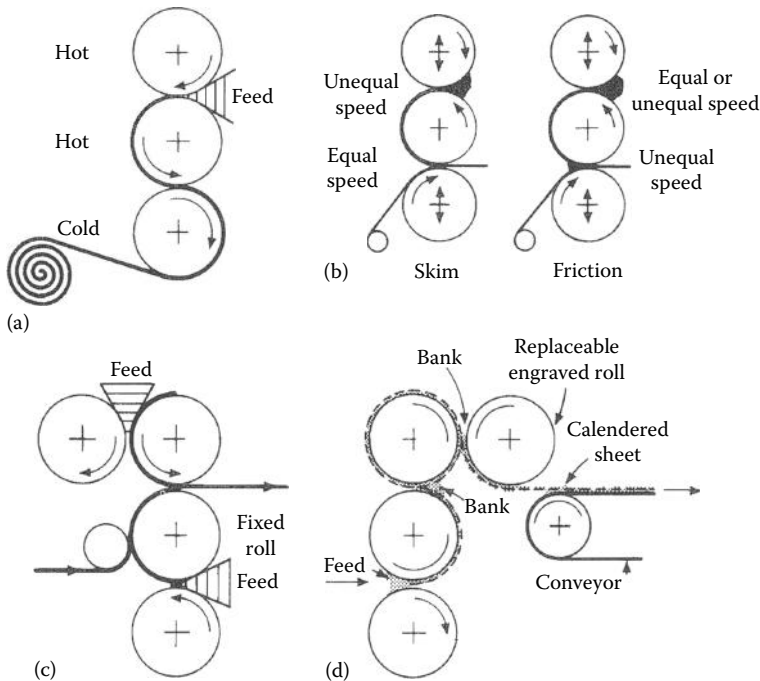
Calendering of rubber and plastics (Data from Winspear, G. G. ed., *Vanderbilt Rubber Handbook*, R. T. Vanderbilt Co., New York, 392, 1958.): (a) single-ply sheeting; (b) applying rubber to fabrics; (c) double-ply sheeting; (d) profiling—four-roll engraving calendar.
